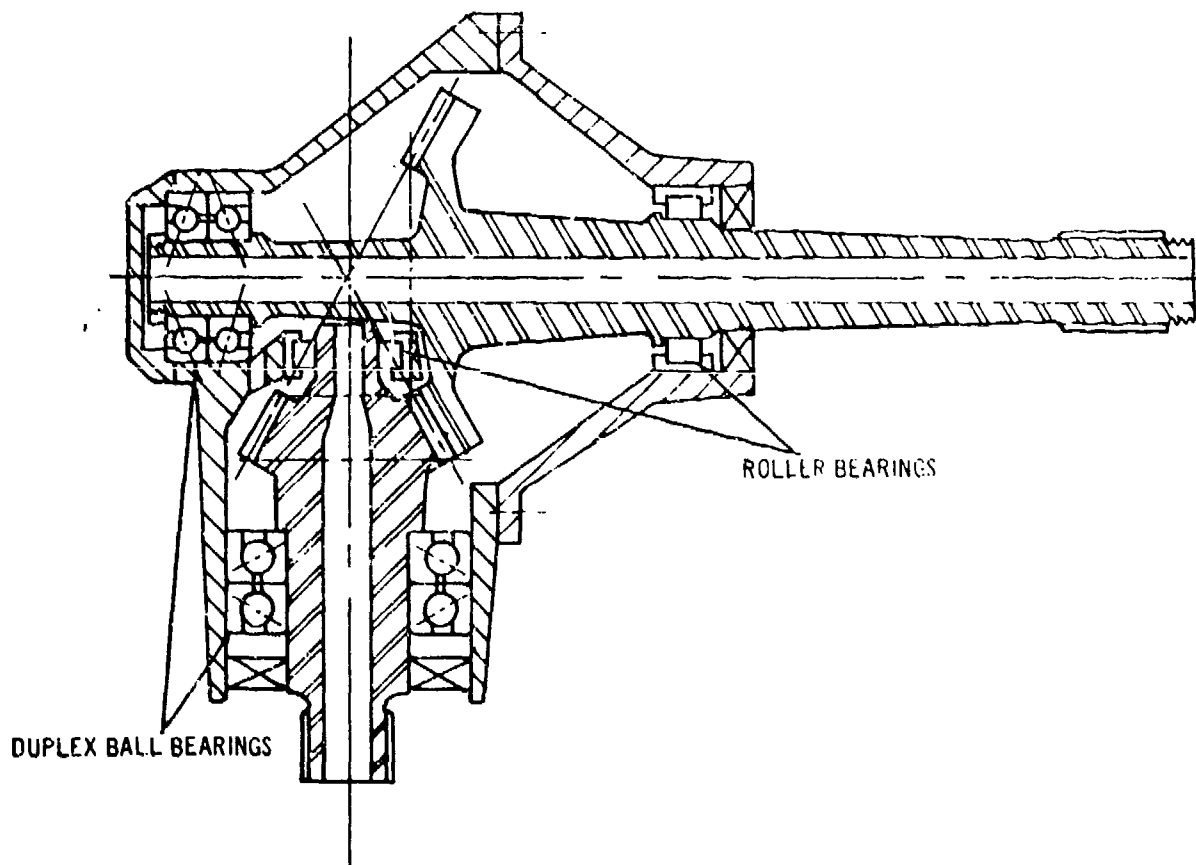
Tail Rotor Gearbox — 7.62 mm Proof
